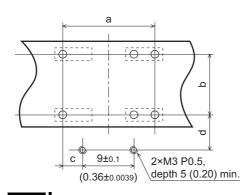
Machining Dimensions of Shield Plate for Installation [Unit: mm (inch)]
